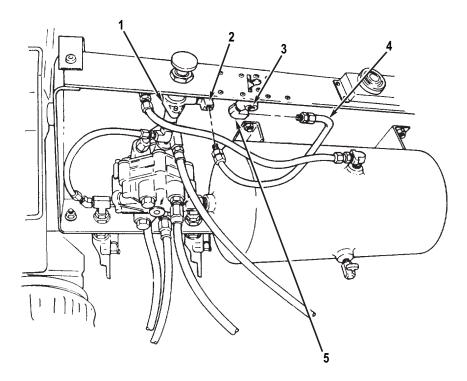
Airbrake Valve-to-Parking Brake Valve Tube Assembly Replacement.
